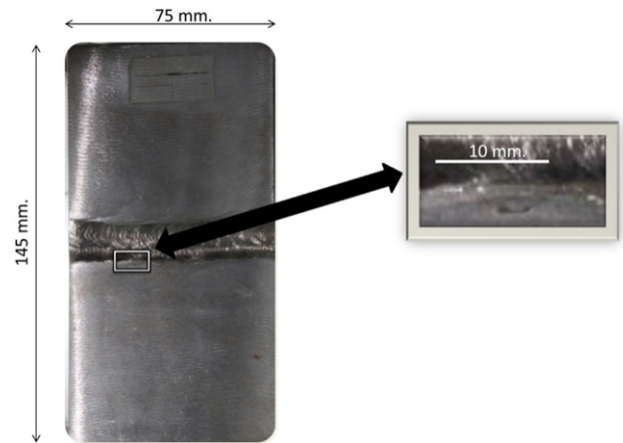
Image and dimensions of the first plaque, which presents a toe crack (detail in the right image).
